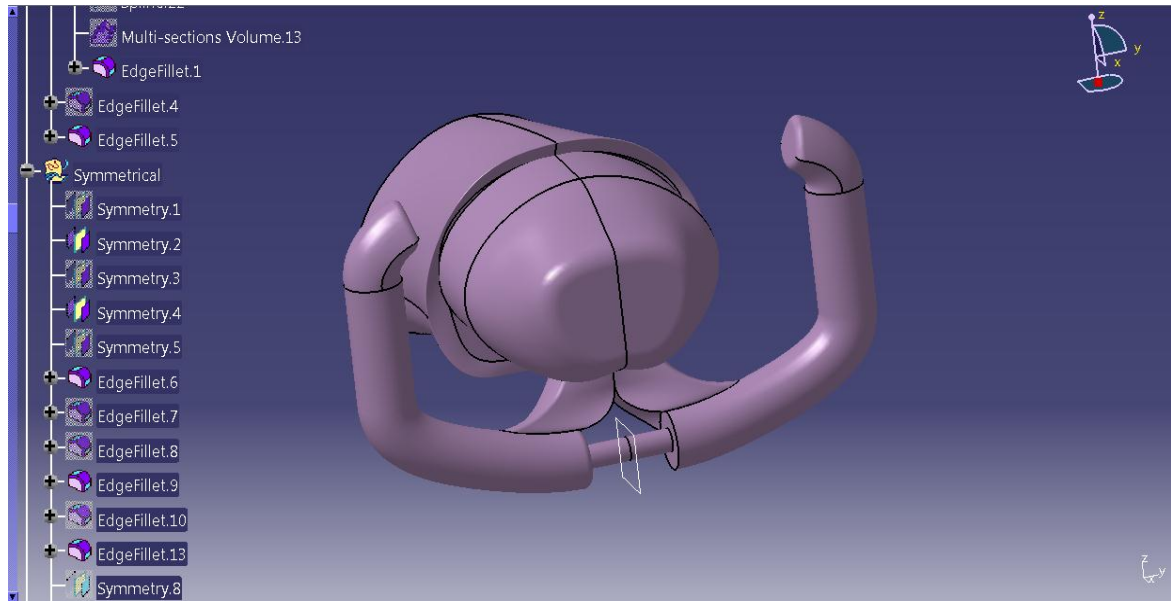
Adjacent to handle complete of steering wheel pillar.
